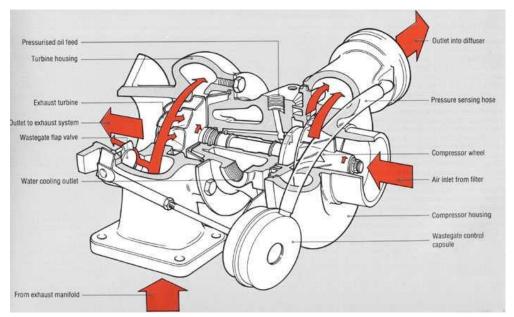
Turbocharger (https://www.brighthubengineering.com/marine-enginesmachinery/41368-components-of-a-turbocharger/)
